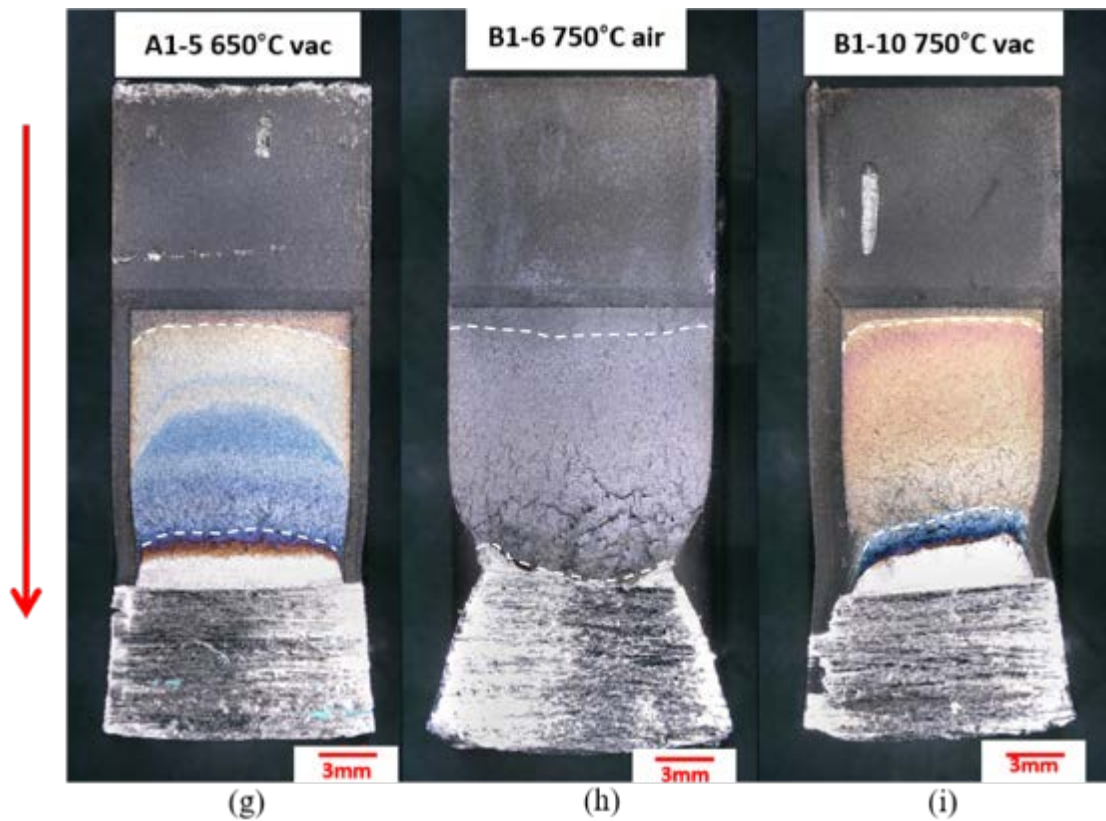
Continued. Optical fractographs for fatigue crack growth testpieces of the as-received Alloy 709 tested in air at (a), (b) 550, (c) - (f) 650°C, (g) 650°C in vacuum (h) 750°C in air and (i) 750°C in vacuum. Note: Red arrows indicate the direction of crack growth. A back-face notch was applied using a hand saw to facilitate the breaking open of the testpieces.
